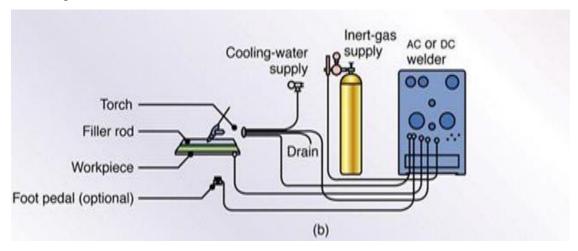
2 - Tungsten Inert Gas Arc Welding equipments. [B]
